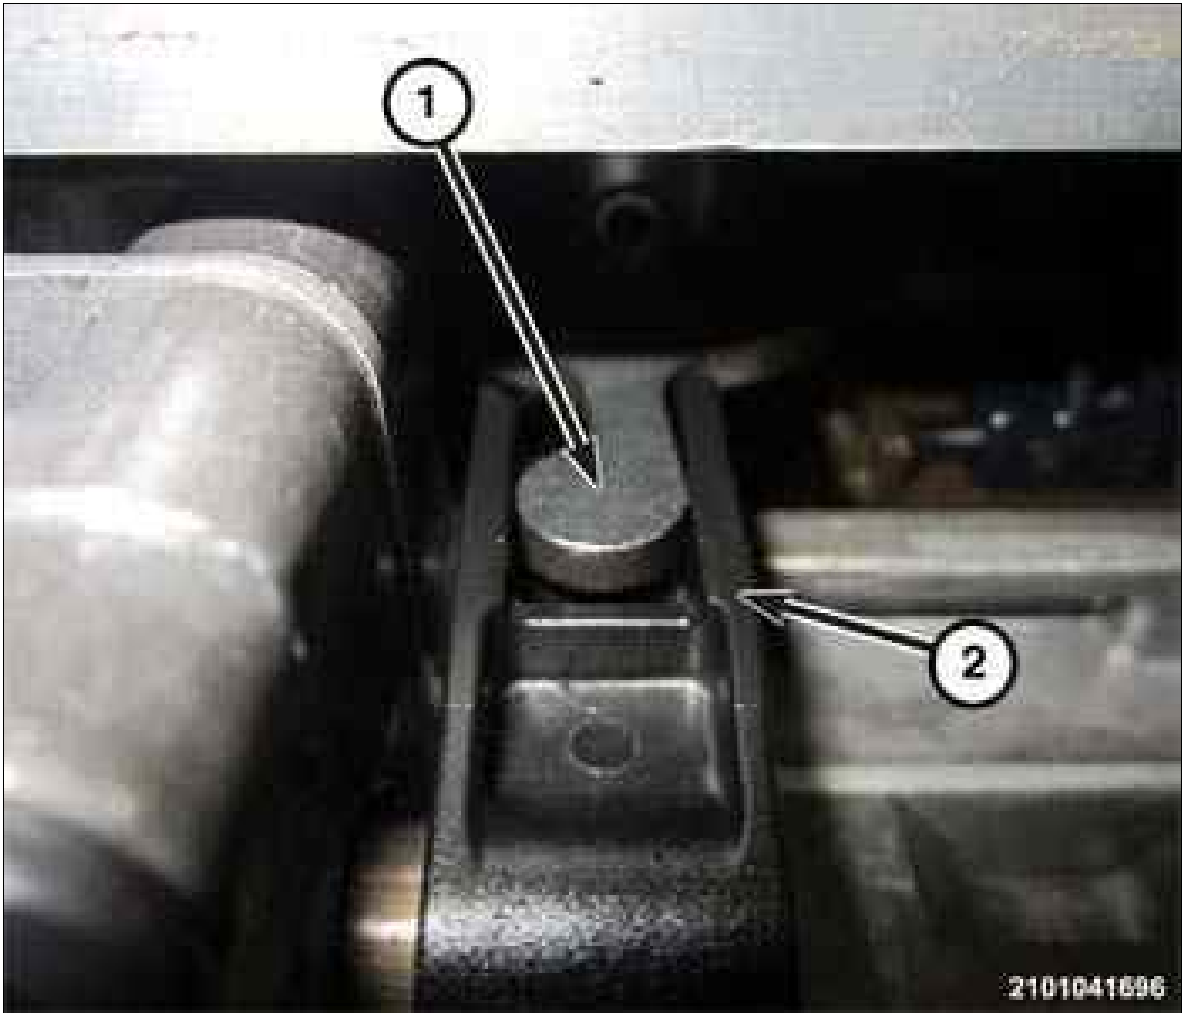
Aligning Valve Body To Fluid Transfer Tubes
